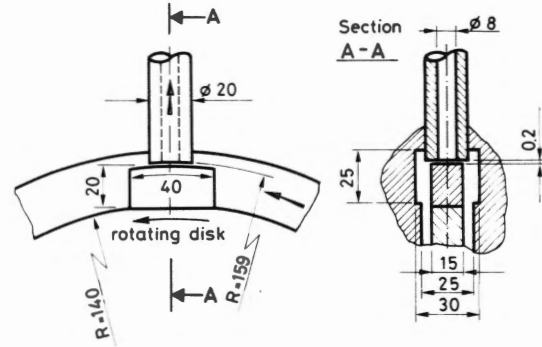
Diagram of the shutter of the rotating valve (all the dimensions are in mm).
